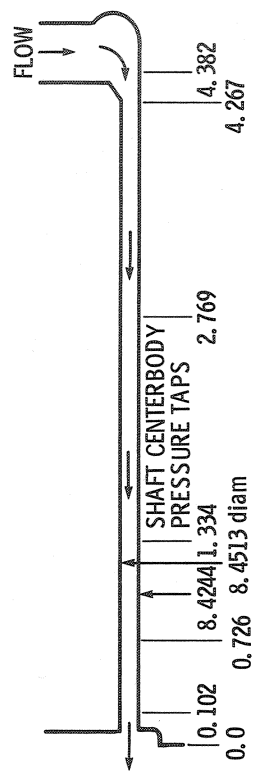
CYLINDRICAL SHAFT SEAL.
